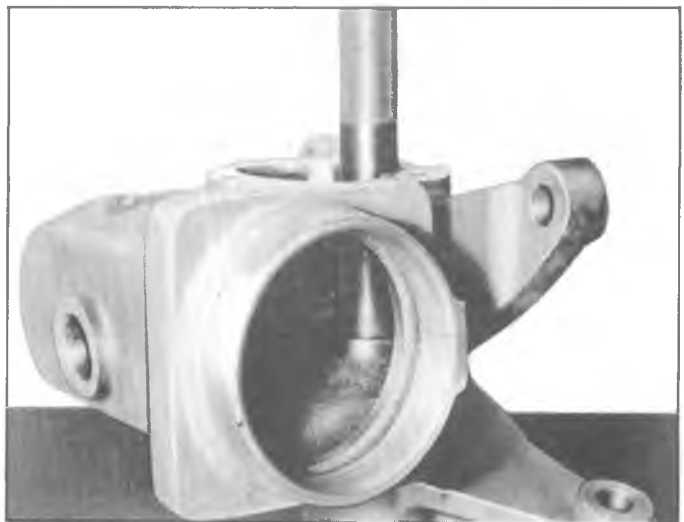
Removing Sector Shaft Bushings Using Remove Tool J-9226 and Handle J-7079-2
